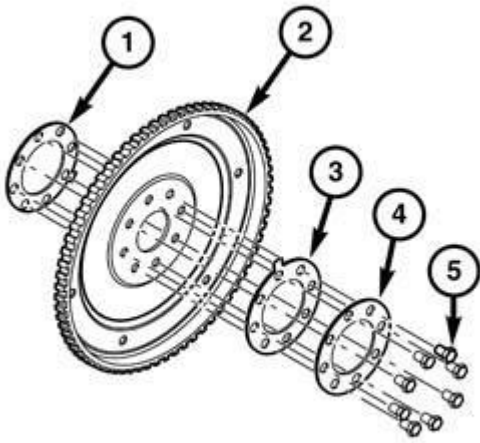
Bolts, Clamp Ring, Shim & Flex Plate
